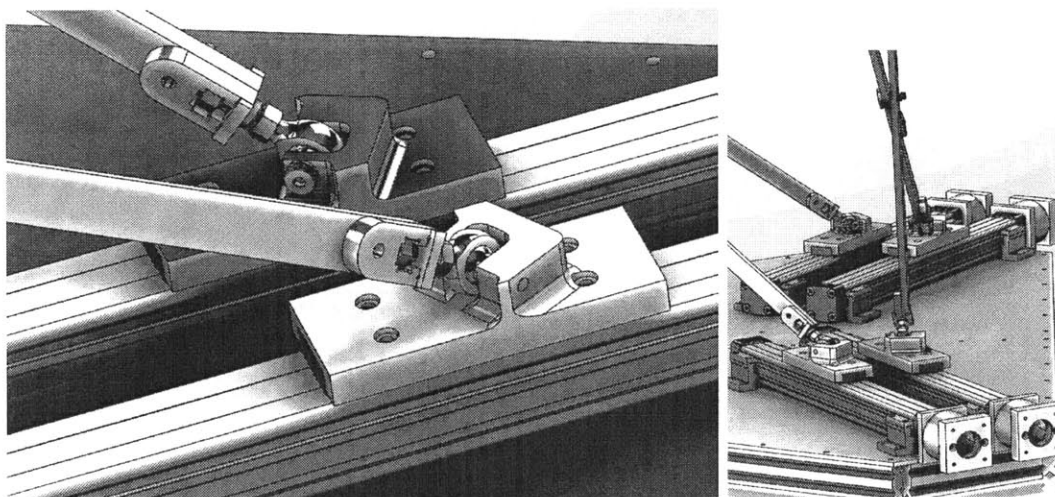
Plastic Bottom Ball Joint Adapters for coupling each scissor mechanism bottom ball joint to its respective linear actuator.
